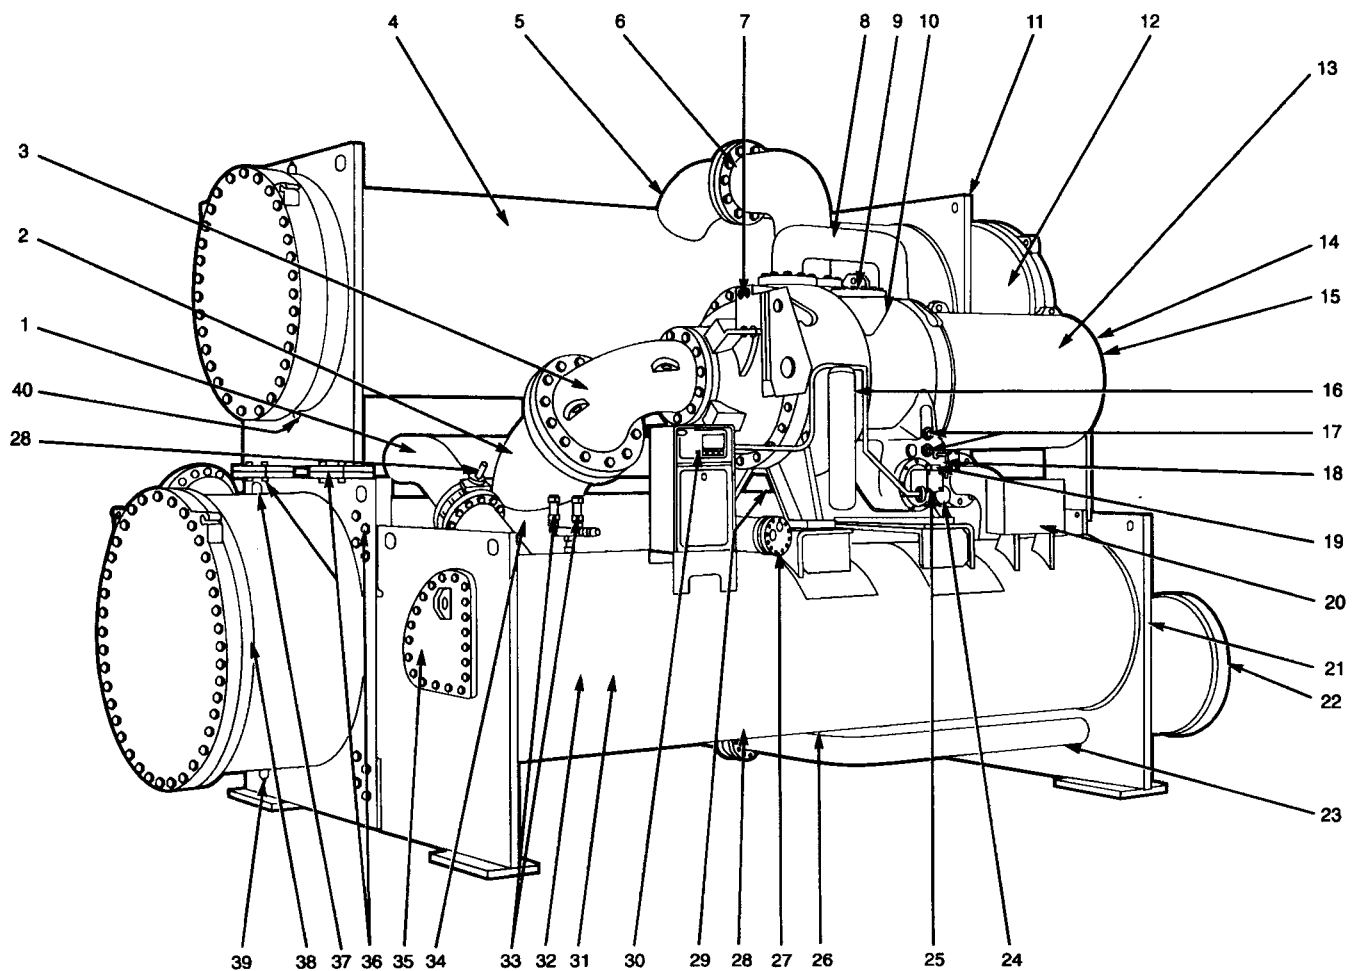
B. Packaged hermetic open drive two-stage centrifugal liquid chiller with flash economizer. (Used with permission: Cat. 521-727, ©1995. Carrier Corporation, a United Technologies Company.)
